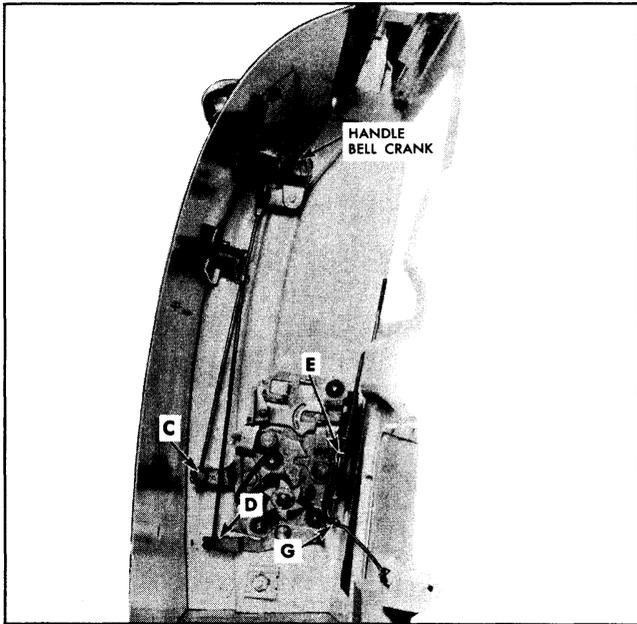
Handle Removal (Ft. Dr. HS)
